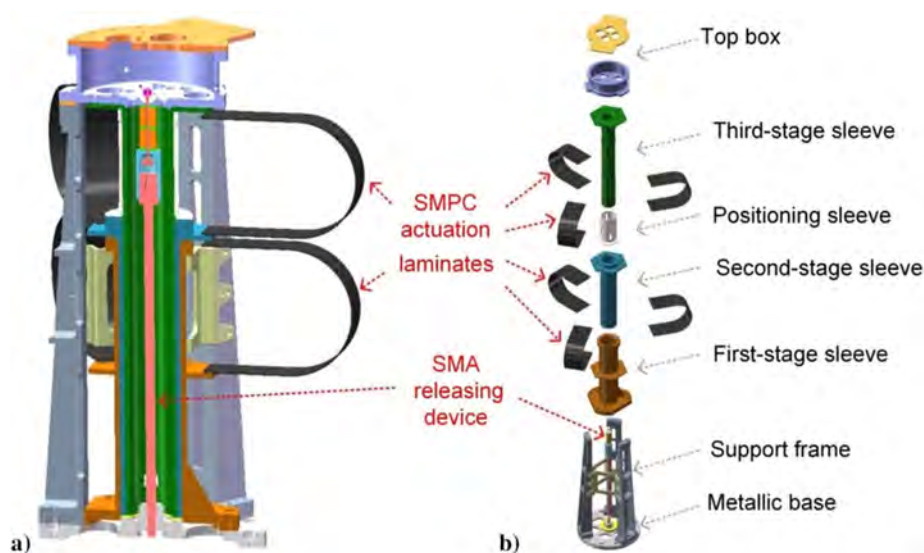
Structural design of the SDT: cross-sectional view (a) and explosive view (b).
